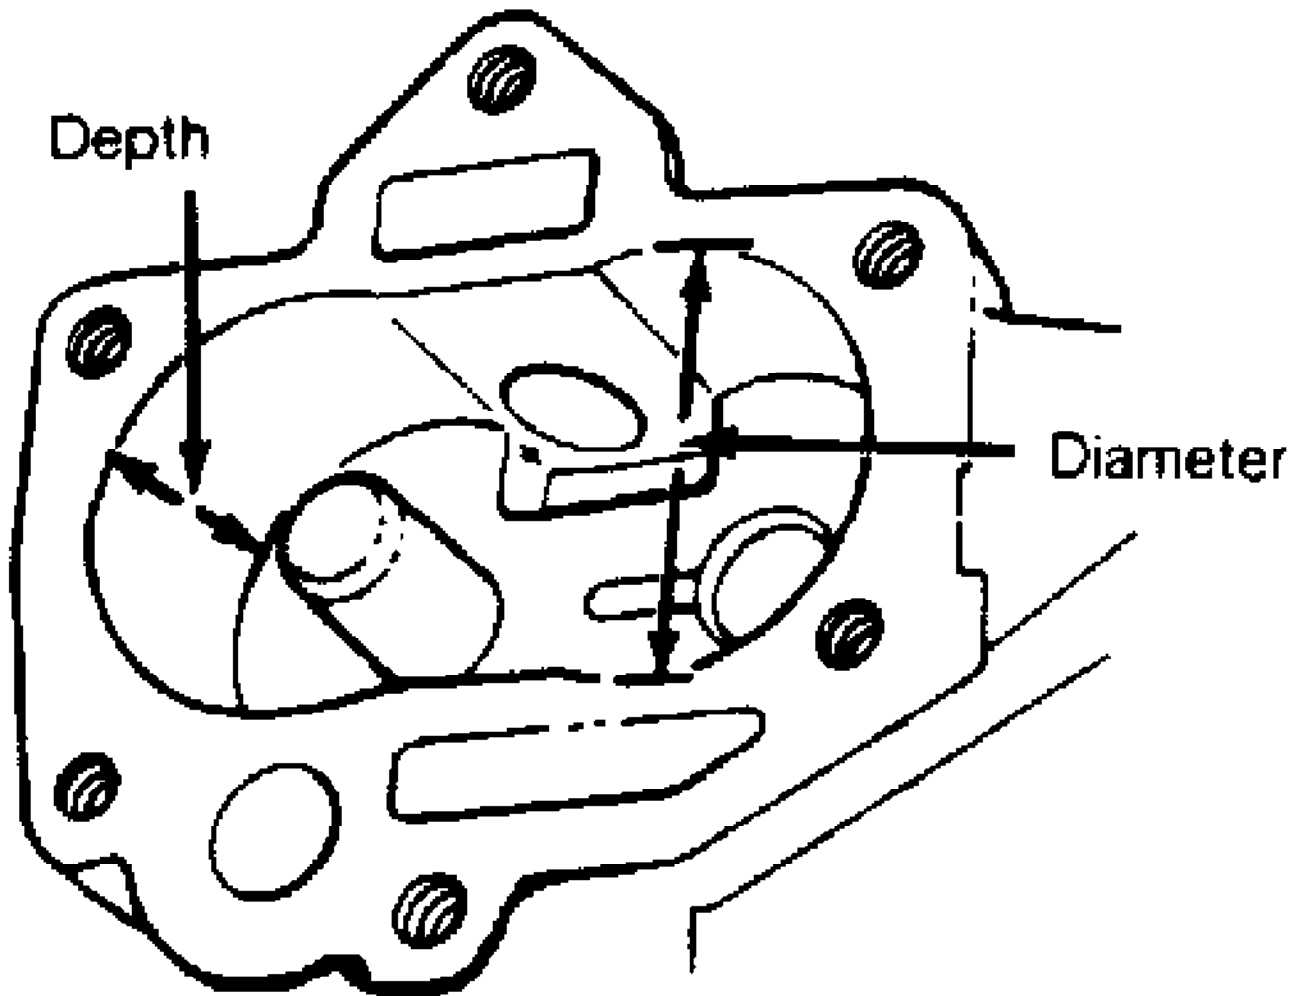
Measuring Oil Pump Gear Cavity - Typical
